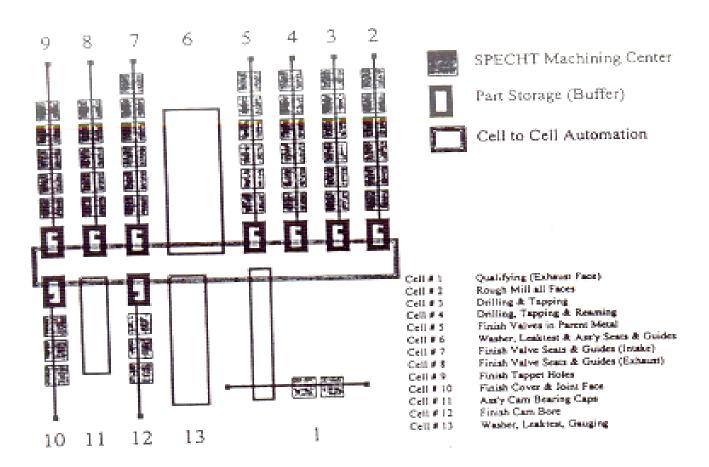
An Agile Manufacturing System for Cylinder Head.
